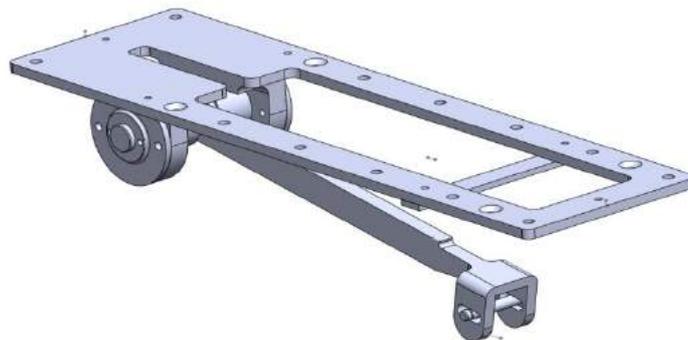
Canister Assembly - Location of Umbilical Retraction Mechanism
